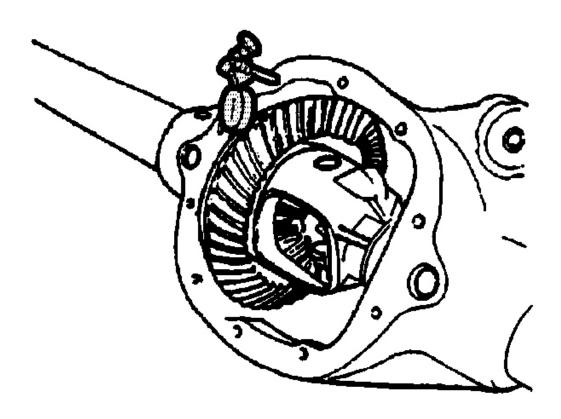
Measuring Ring Gear Backlash Courtesy of GENERAL MOTORS CORP.
